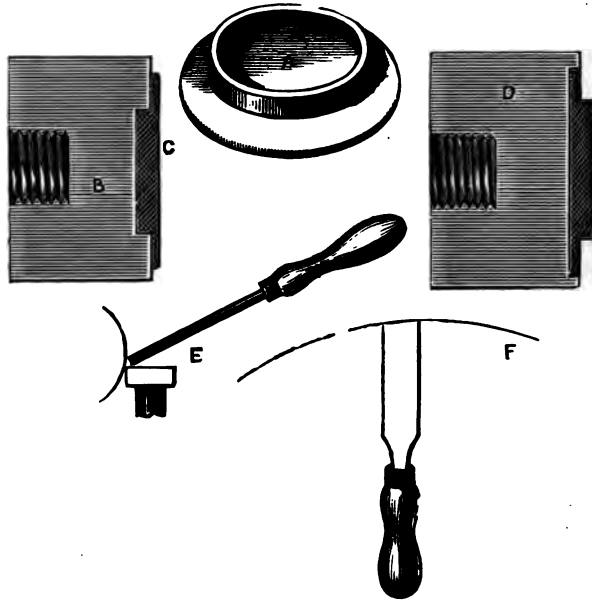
CASTINGS, &c., FOR CYLINDER STEAM ENGINE.
